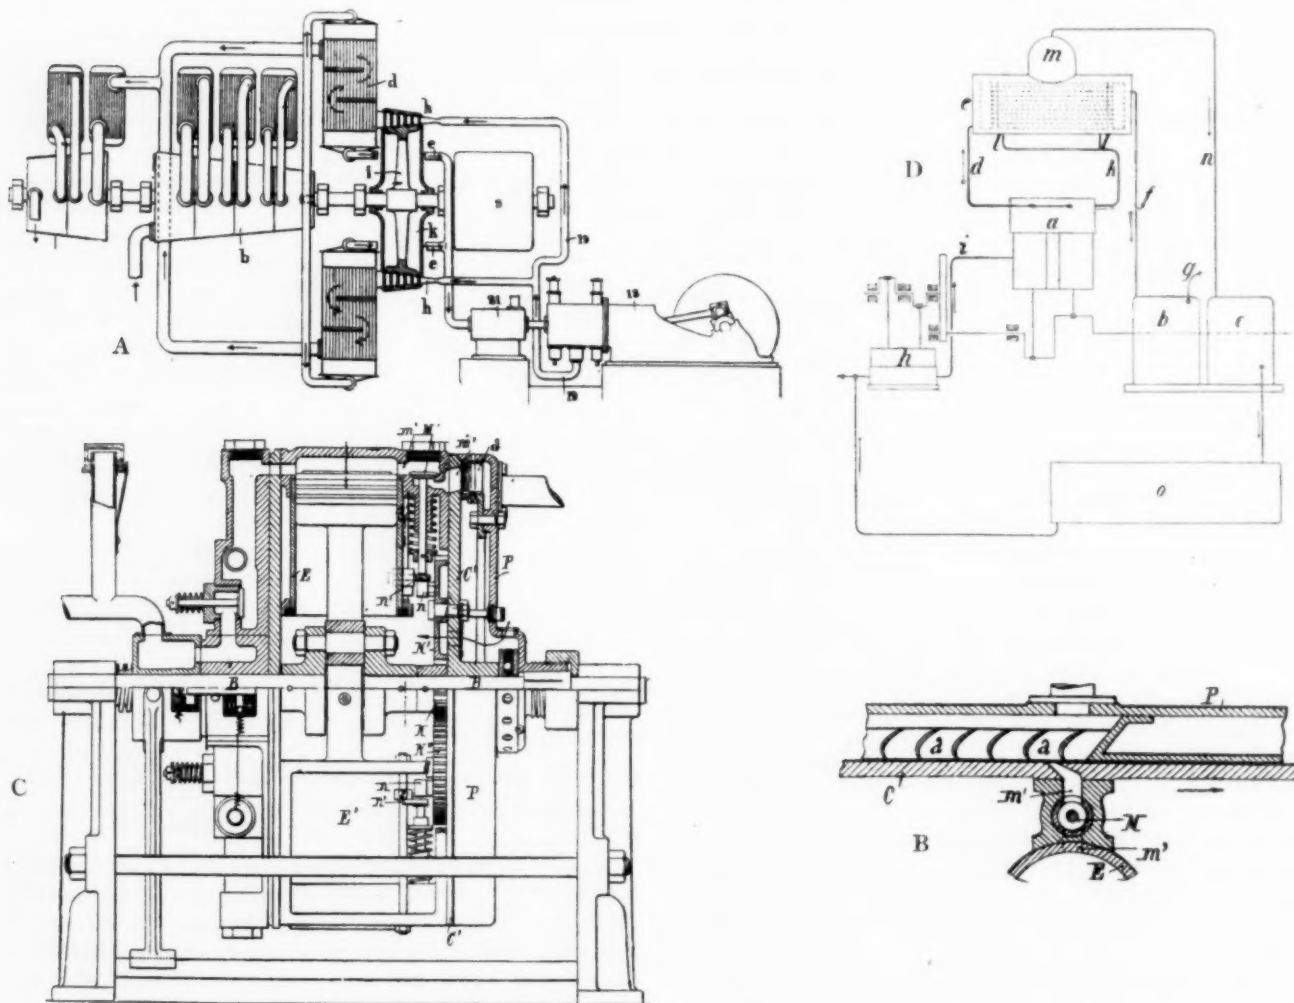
APPARATUS FOR UTILIZING EXHAUST HEAT FROM INTERNAL COMBUSTION ENGINES IN PRIME MOVERS
